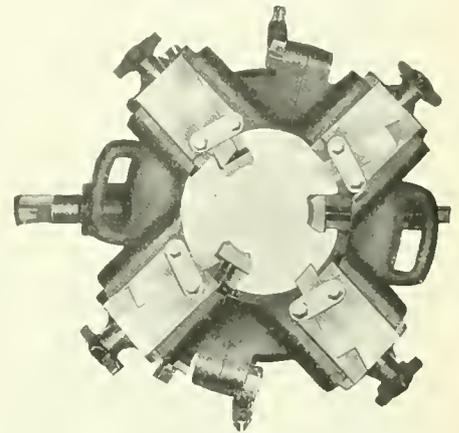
HAND-OPERATED PIPE-CUTTING MACHINE
